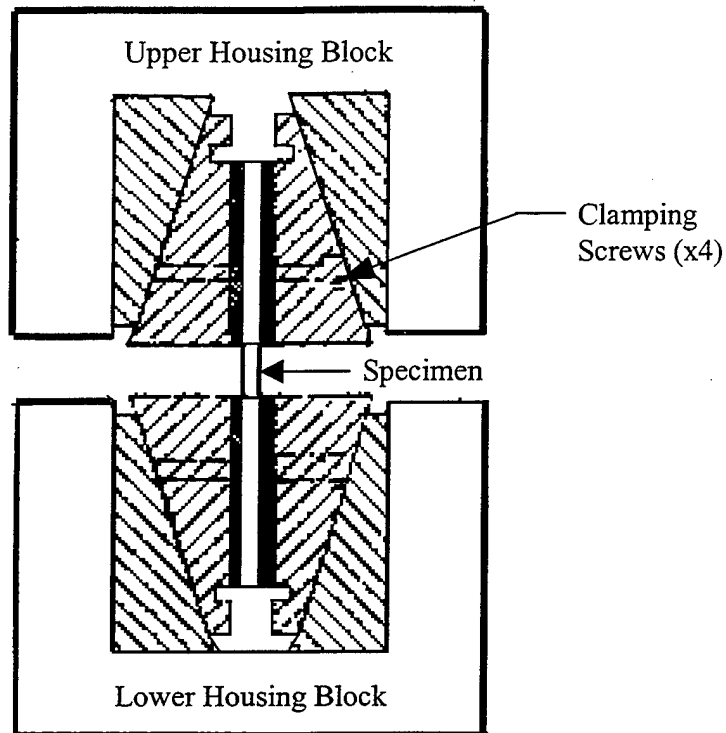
ITRII Test Fixture (or Test Fixture B in ASTM Standard).
